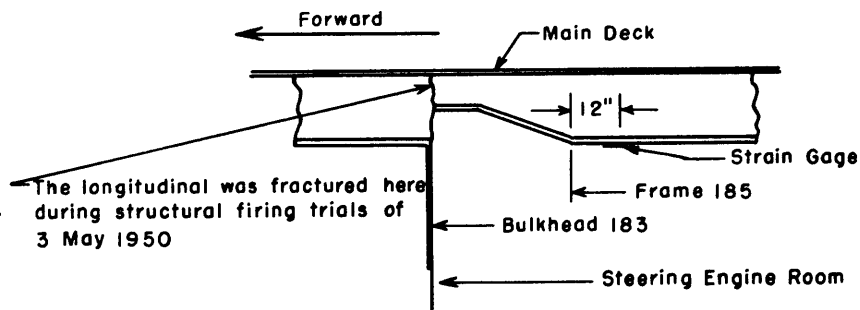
Elevation of Longitudinal, 4 1/2 Feet Port of Centerline
